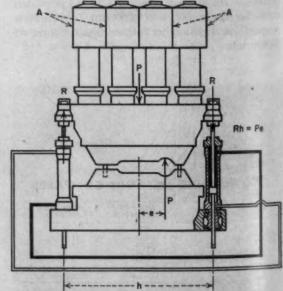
Two double-acting cylinders provide press equalization under eccentric forging loads. Fluid, in black, is locked in circuit.
